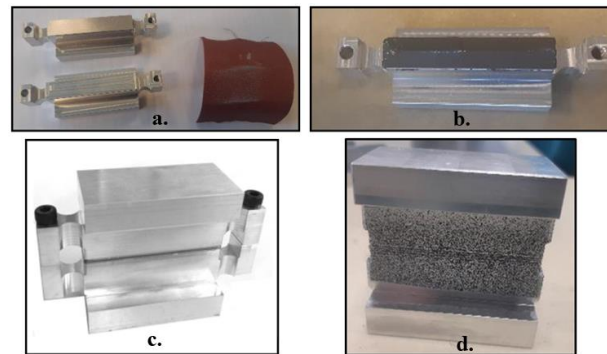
Sample preparation: a - surface polishing; b - adhesive application; c - assembled sample; d - sample ready for testing
